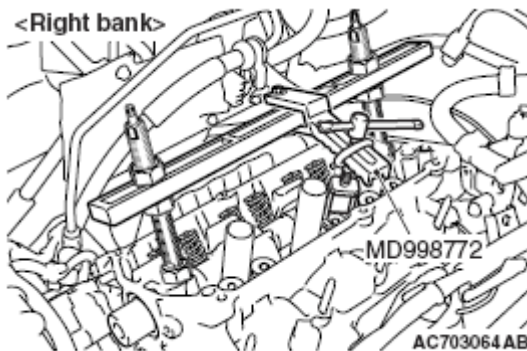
Compressing Valve Spring Using Special Tool MD998772 - Right Bank
